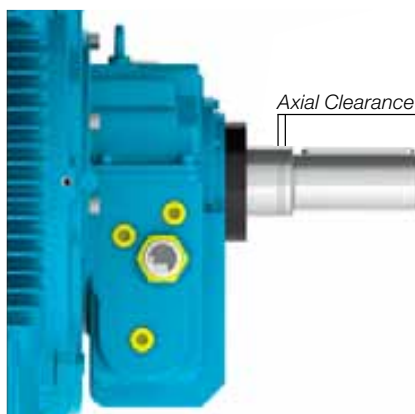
Axial clearance of motor designed with sleeve bearing
